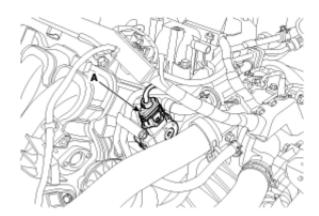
Identifying VCM Connector Courtesy of HYUNDAI MOTOR CO.
